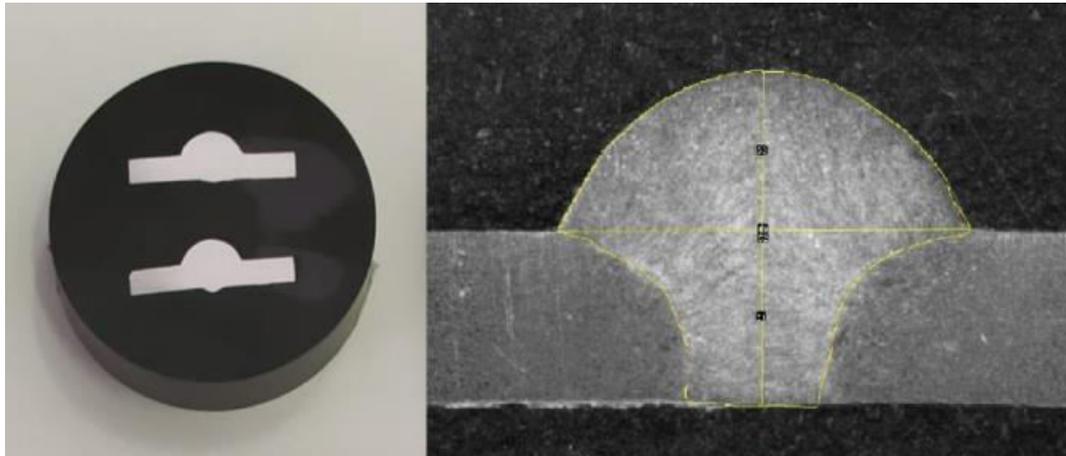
Macrography (a) embedded samples and (b) treated image of weld bead.
